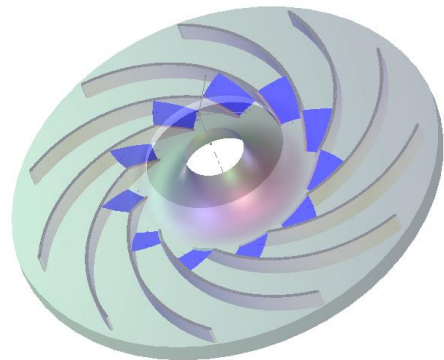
Drawing of a 2D-impeller for the second and third stage
